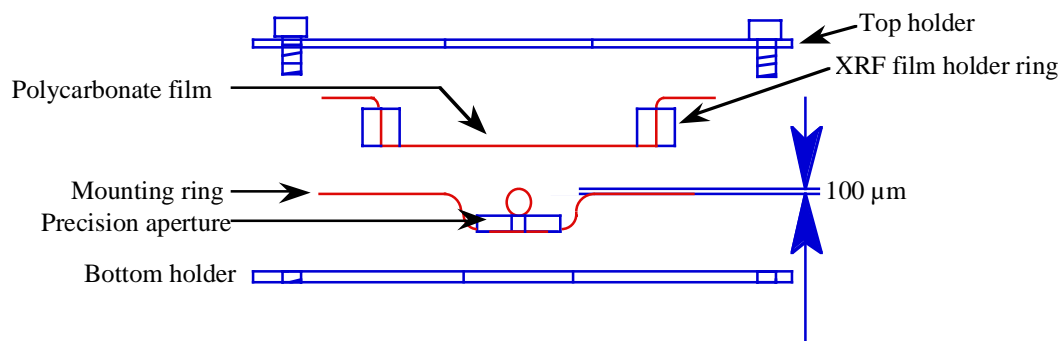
Drawing of fixture to align and hold capsule and aperture in place for coating a bump on a capsule.
